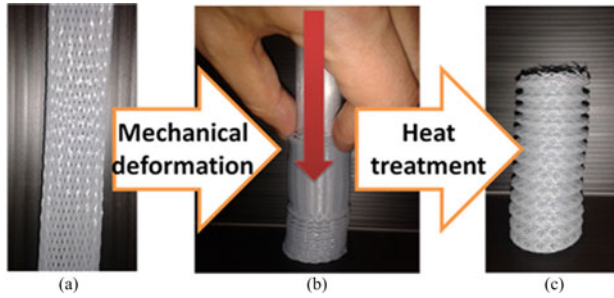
Fabrication phases of the crimped braided sheath. The commercial sheath (a) is pushed and forced to slide on a cylinder to produce crimps (b), and after the heating process, the crimped structure remains stable (c).
